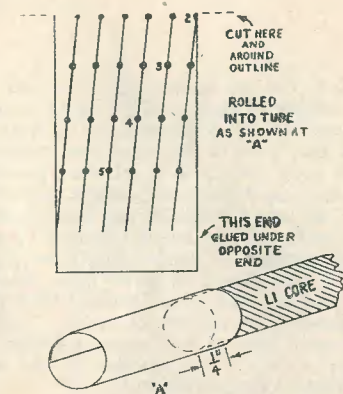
Showing method of assembly of the tuning scale, and a scale which may be cut out and used for this purpose
